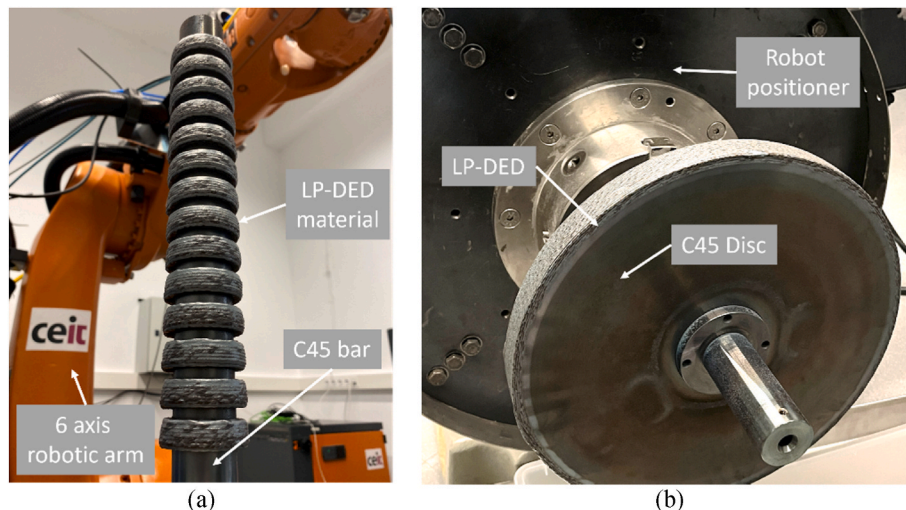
Manufactured LP-DED specimens before machining for (a) fully cladded twin-discs and (b) fully cladded scaled test bench.
